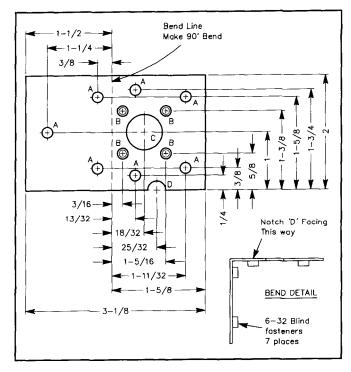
RF-output connector bracket is made from 0.062.-in. aluminum. Holes marked A are 3/16-in. diam., for 6-32 blind fasteners. Asterisks (*) indicate holes that should be located using the top cover as a template when the bracket is mounted. Holes marked B are No. 30, countersunk for flush mount with 4-40 screws. The connector mounting holes may also need to be countersunk. Hole C is 5/8 in. diam. Hole D is a 5/16-in. diam. notch to clear the blower mounting plate.
